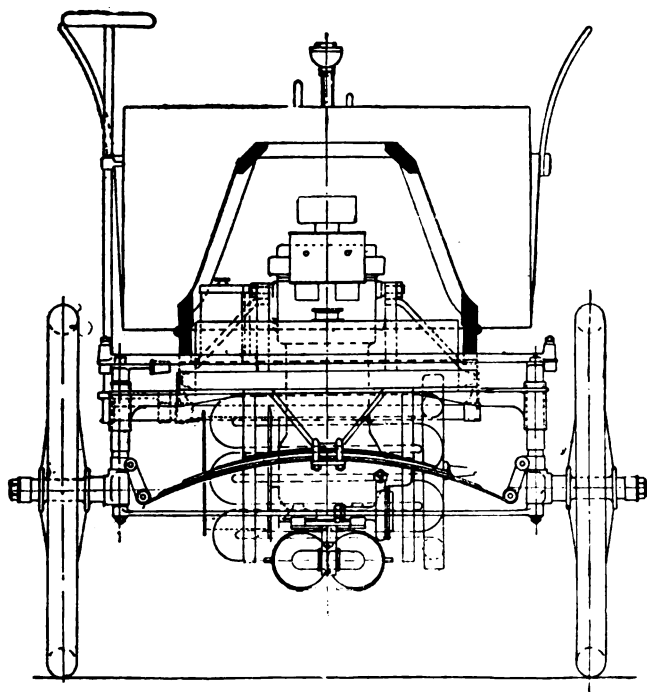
FRONT ELEVATION DAIMLER "KIMBERLEY" CAR.
